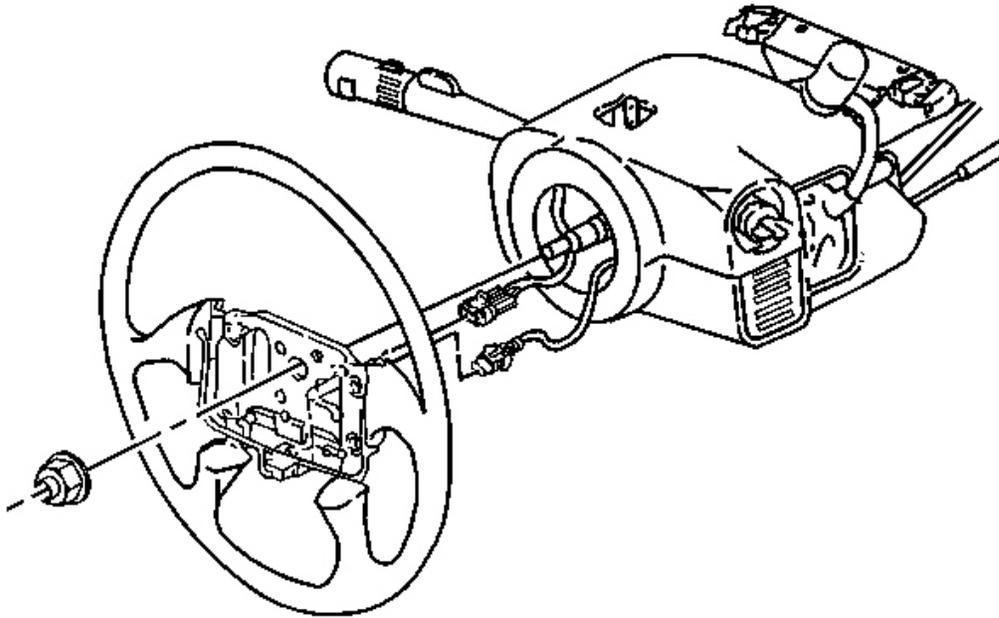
Inflatable Restraint Module, Steering Wheel Module, Ground Wire, Horn Wiring Harness & Screws
